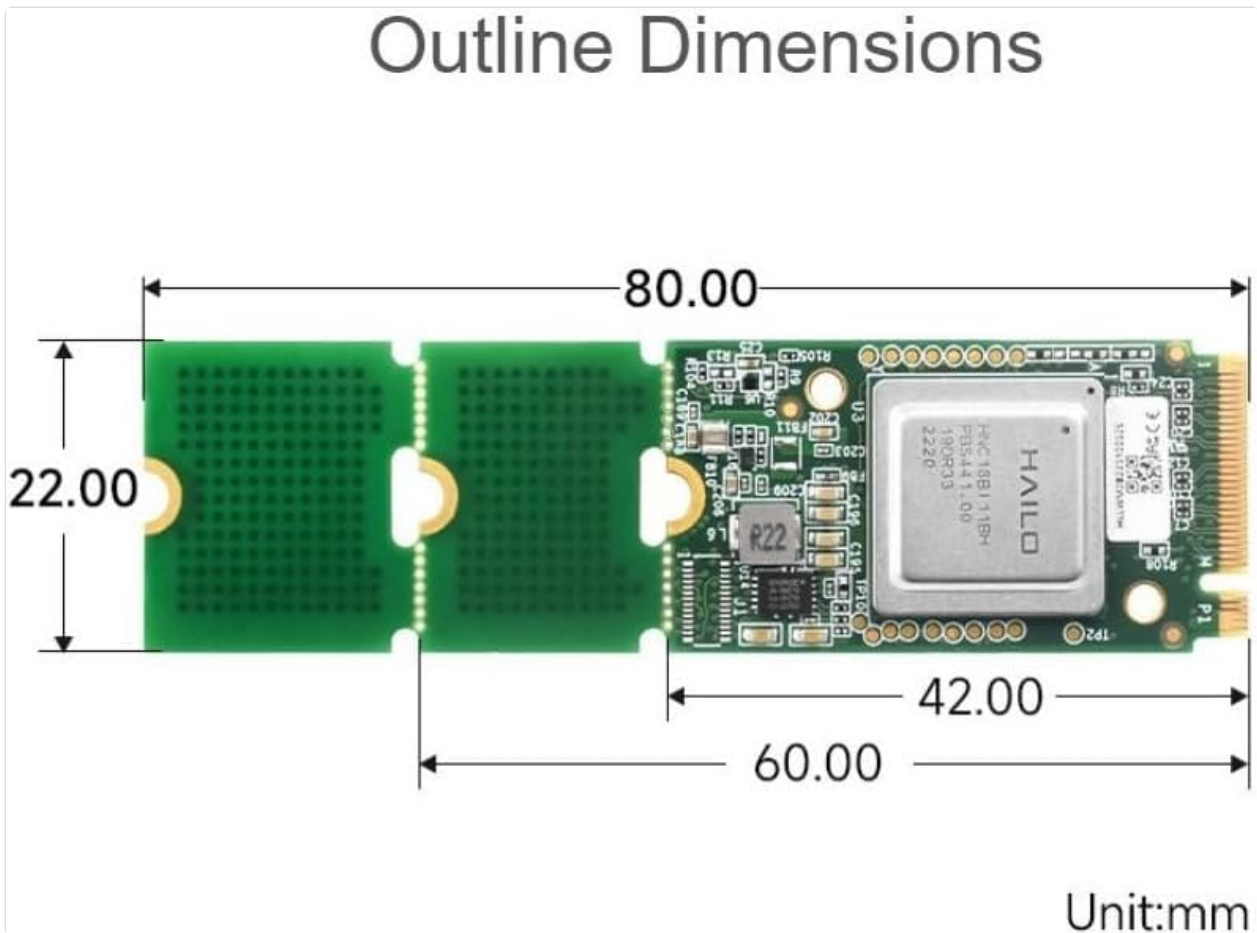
Outline dimensions of the Hailo-8 AI M.2 Module, showing a width of 22mm and a length of 80mm, with breakable sections for 42mm and 60mm lengths. All units are in millimeters.
